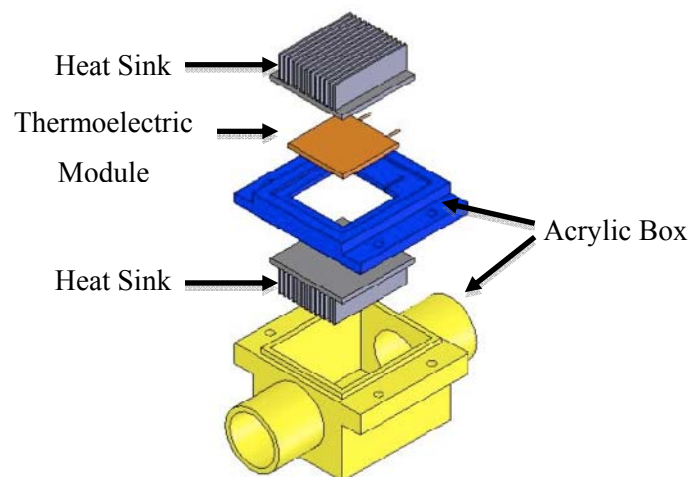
Design of the thermal chamber using one piece of TEM
